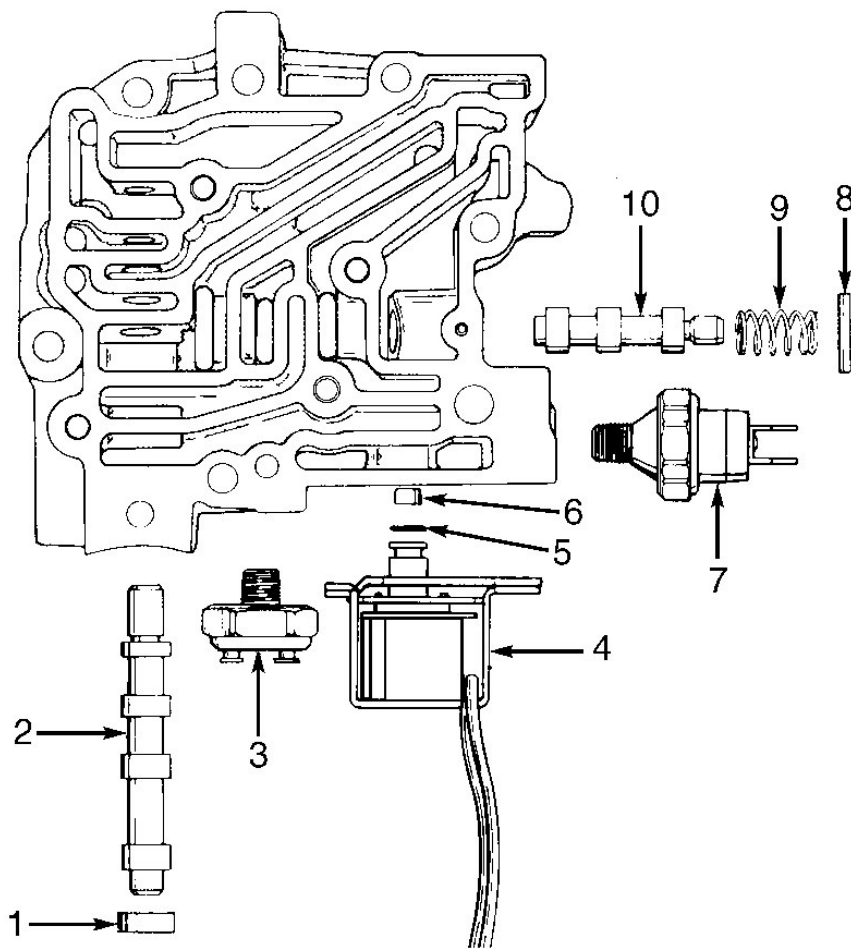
Exploded View of Control Valve Body & Oil Pump Assembly
